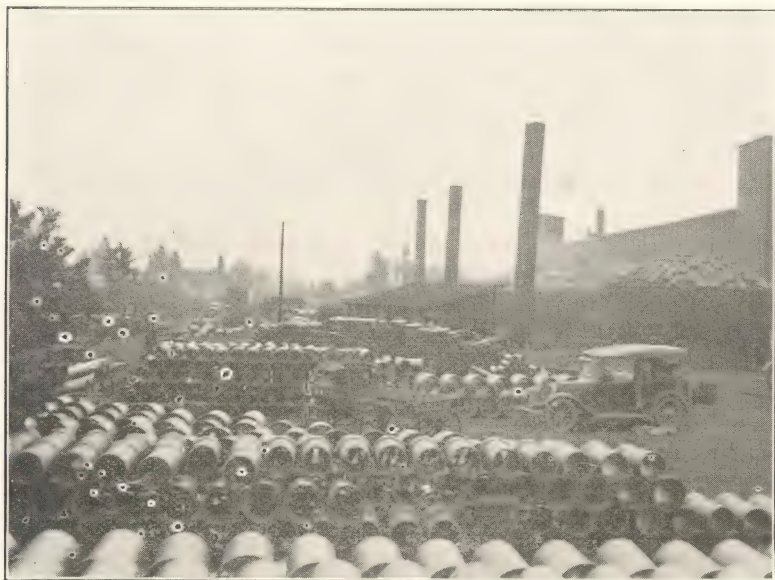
Stock yard and kilns of Owensboro Sewerpipe Company.
